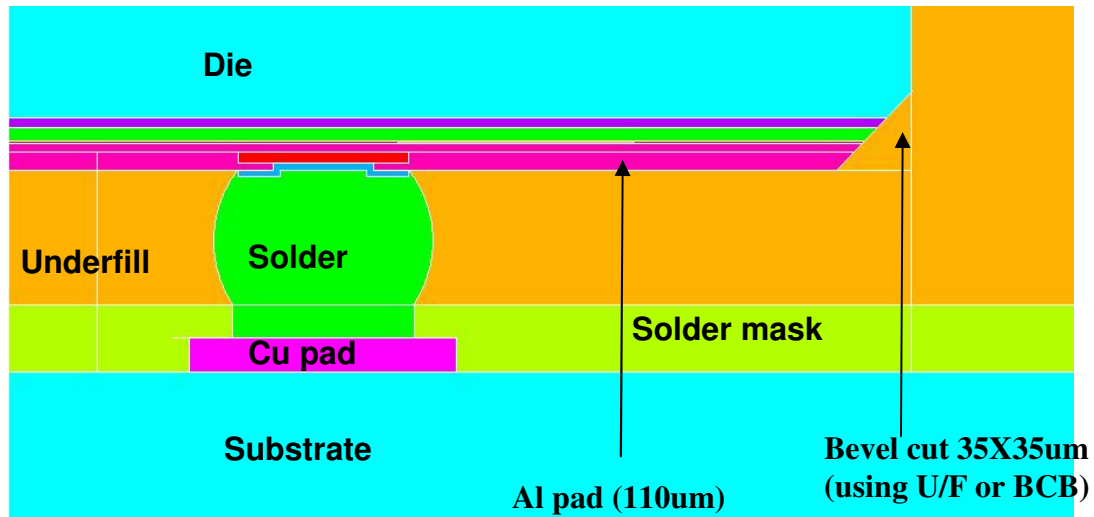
Cross-section of package showing bevel cut (PEDL)
